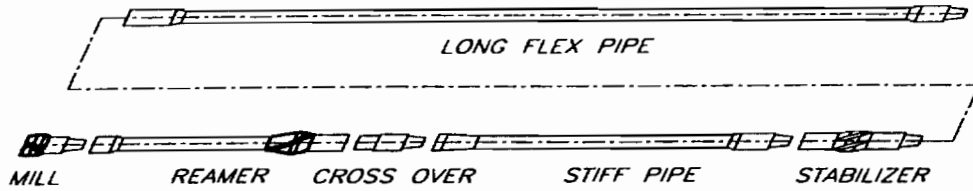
CT Window Mill Assembly for 5½-in. Casing
